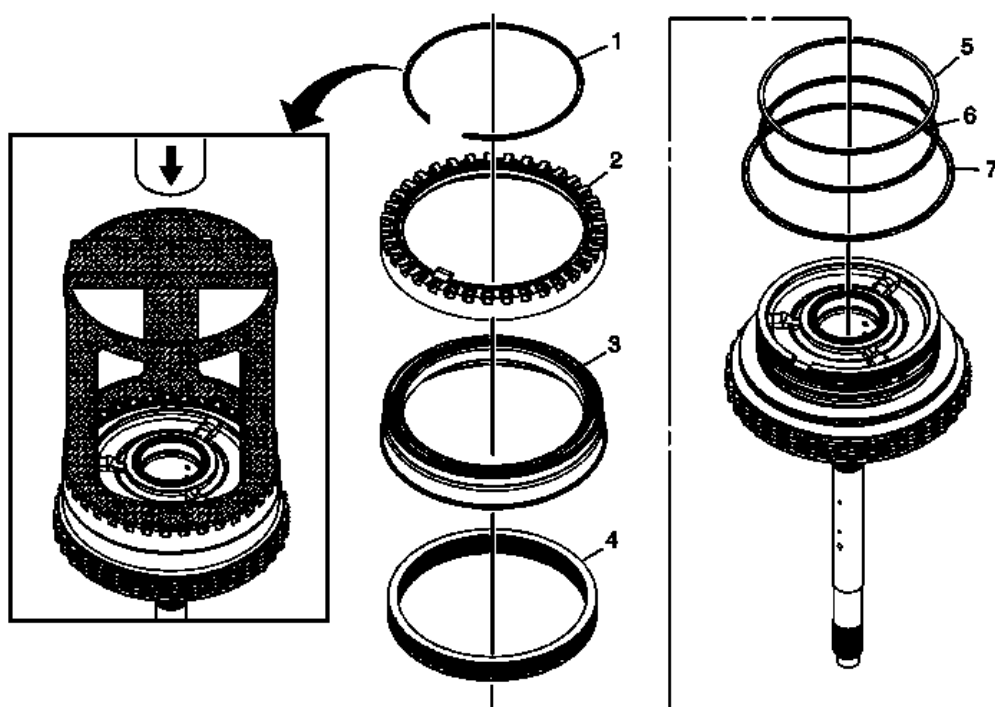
View Of Input Shaft Speed Sensor Reluctor Wheel Piston & 3-5 Reverse Clutch Piston
